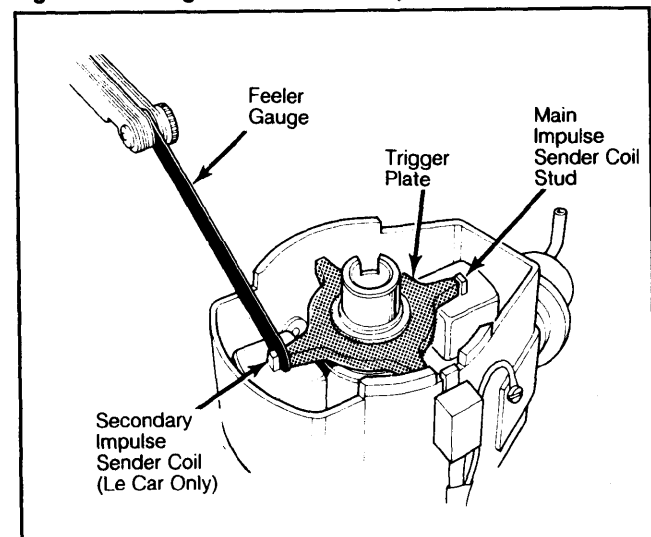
Adjusting Ignition Timing by Misaligning Trigger Plate Arm 3°
